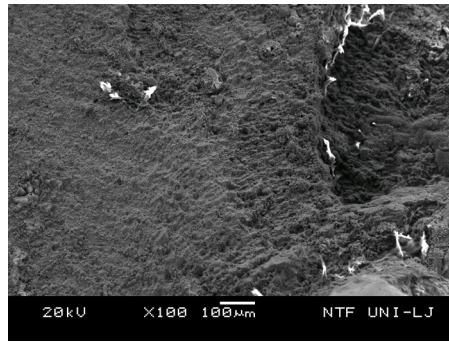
Part of the fracture surface with a gradual crack propagation (corrosion induced fatigue).
